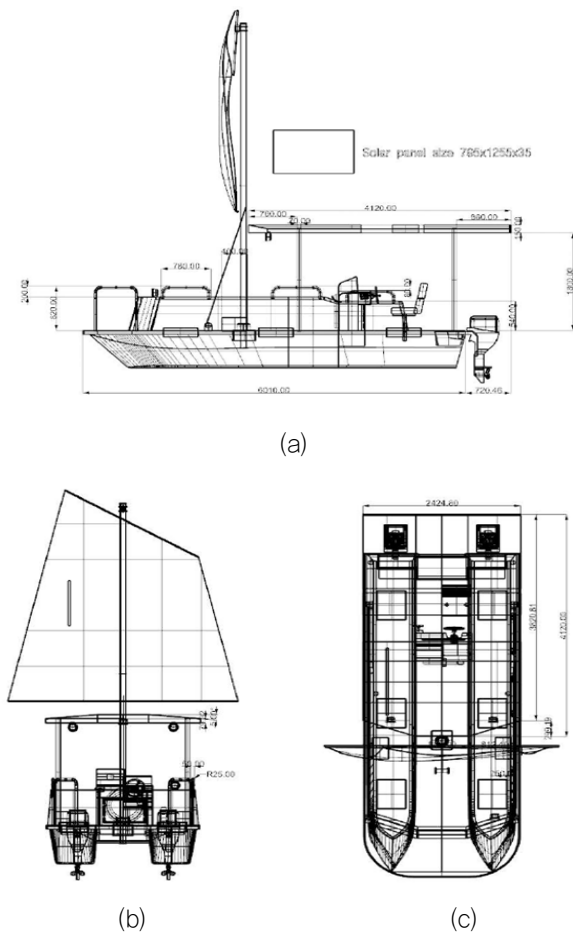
Drawing image with respect to eco-environmental leisure boat with a photovoltaic hybrid generating system ; (a) elevation, (b) section and (c) plan
